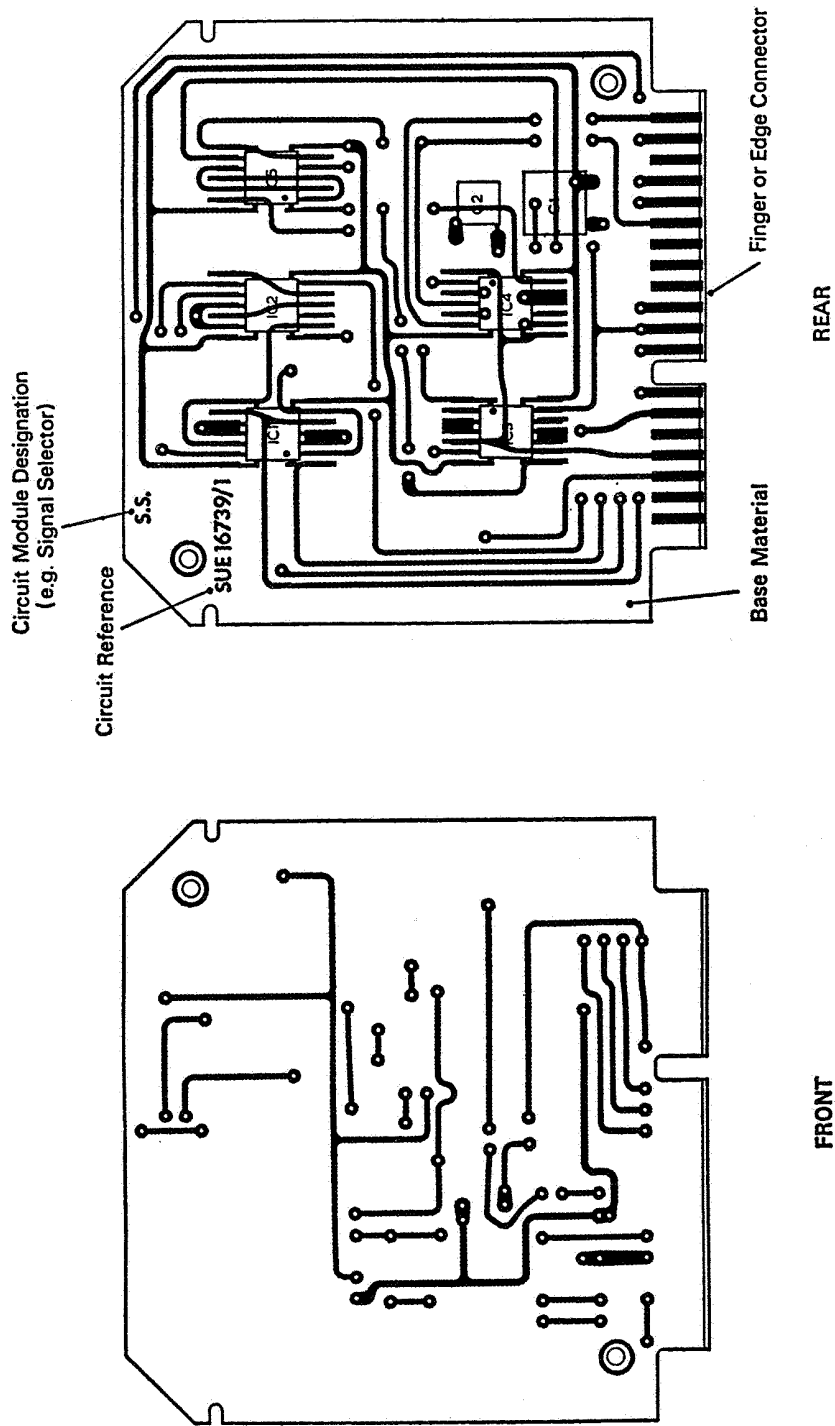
TYPICAL DOUBLE-SIDED BOARD
